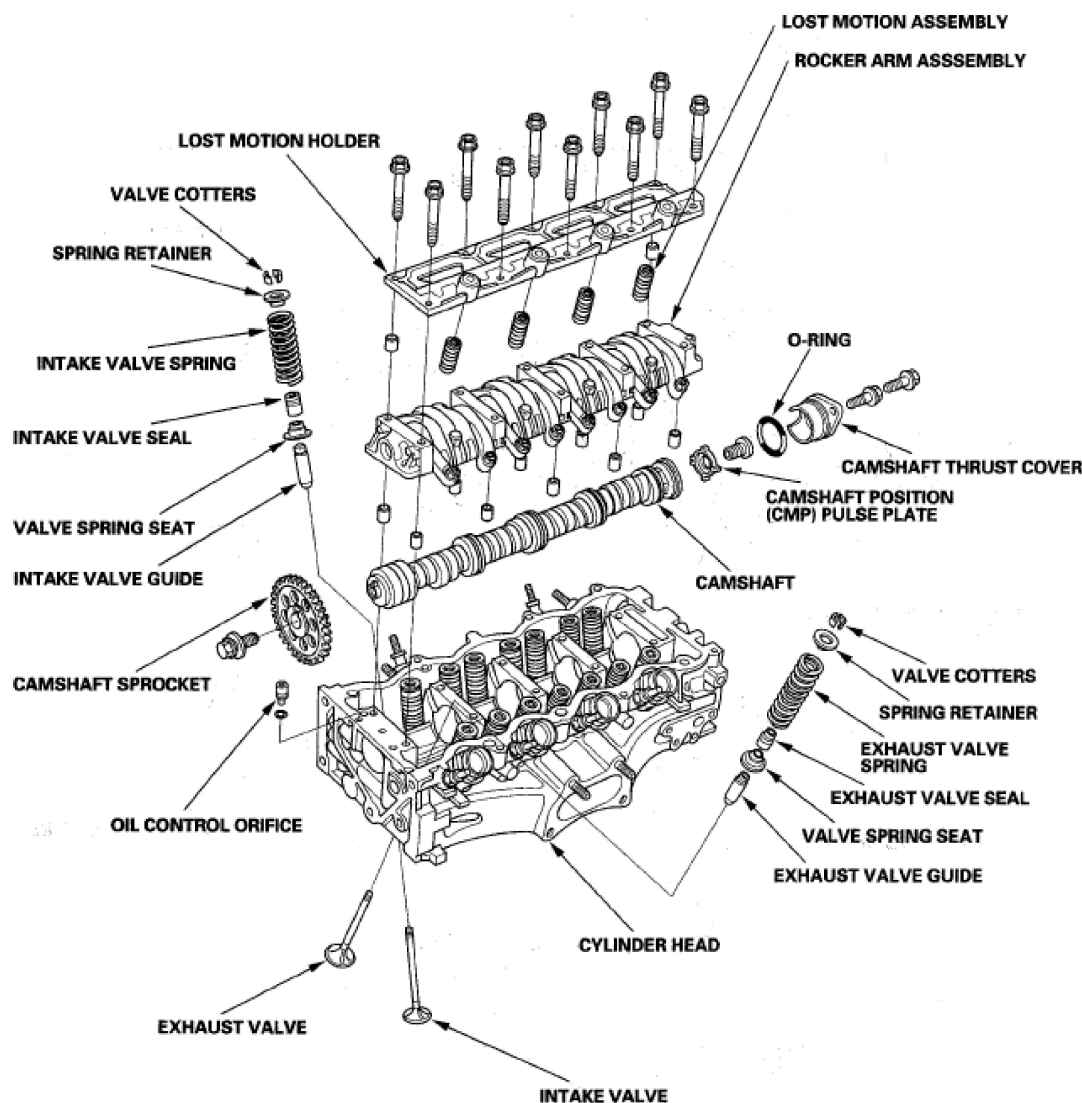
Identifying Cylinder Head Components (3 Of 3)
